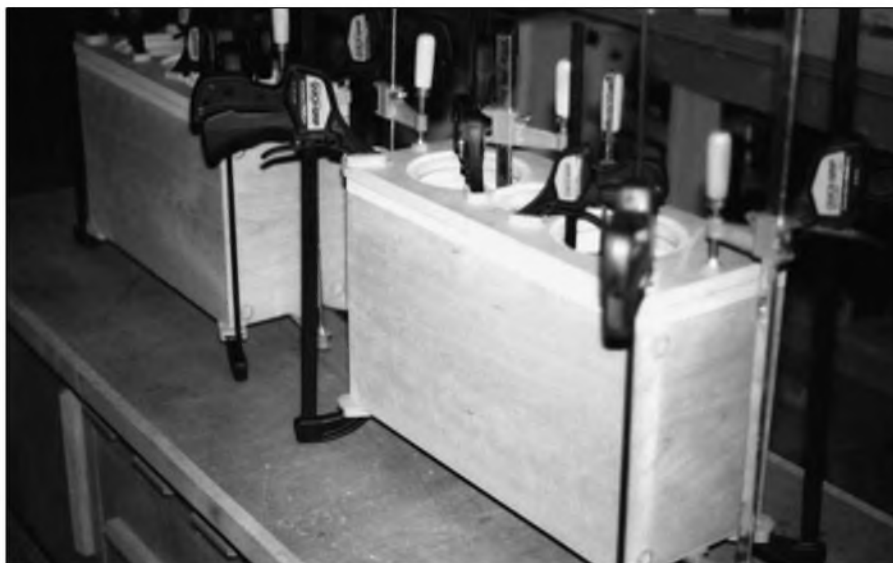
Gluing the front panel with driver cut-outs on to the first layer of MDF.
